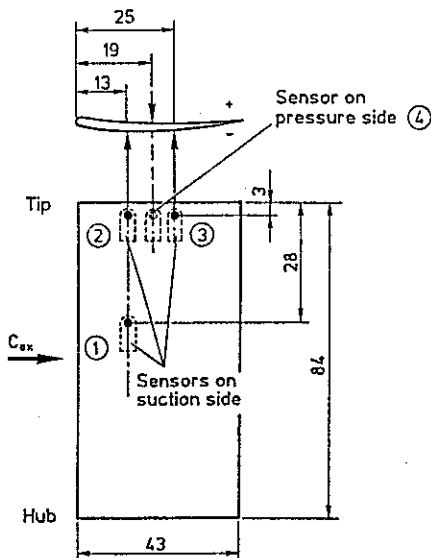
Schematic of pressure sensors mounted on the impeller blade.
